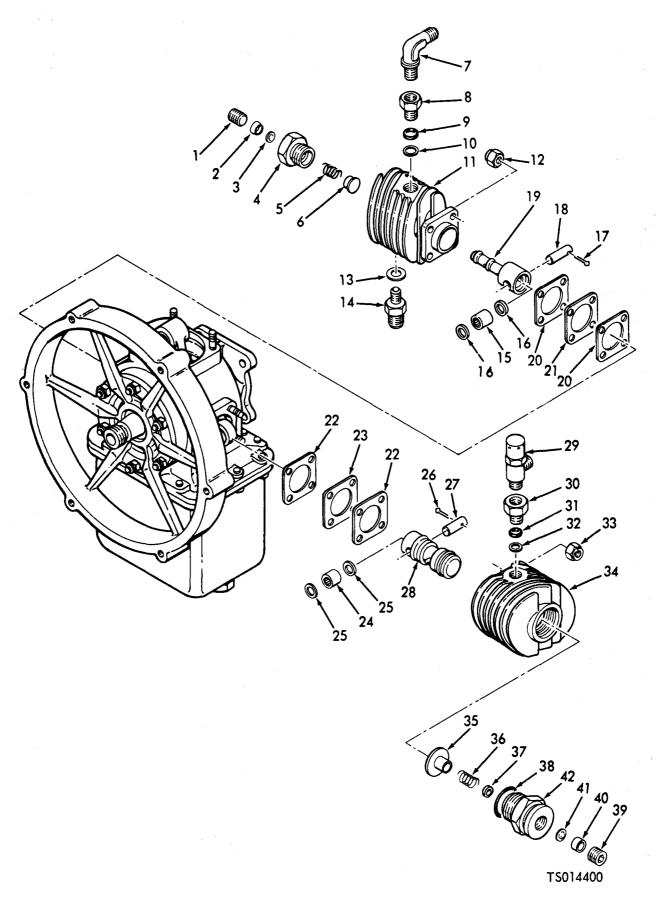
Second and third stage cylinders and pistons, removal and installation.
